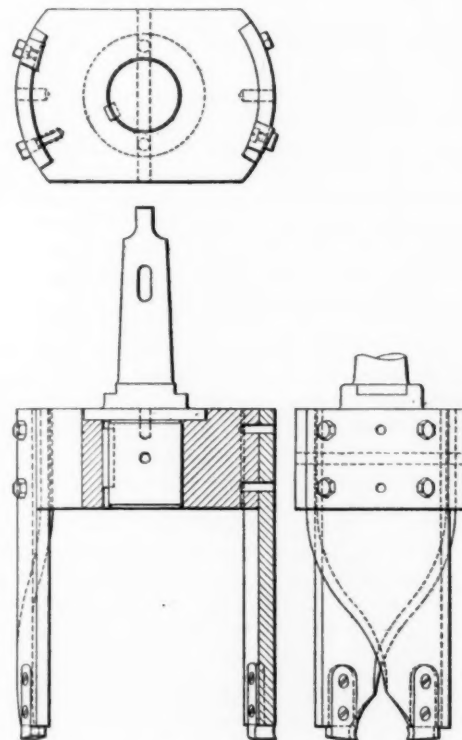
TREPPANNING TOOL FOR HOLES UP TO 15 IN. DIAMETER
